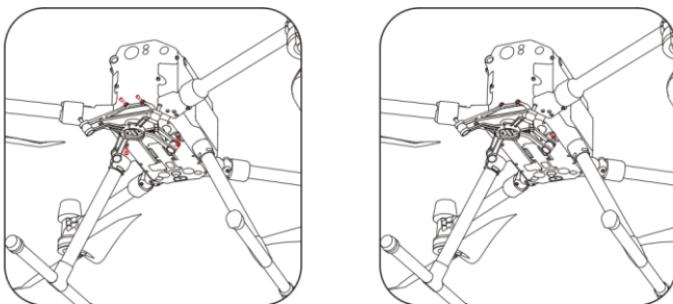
Standard Vibration-Damping Mount Installation and Dismantling
